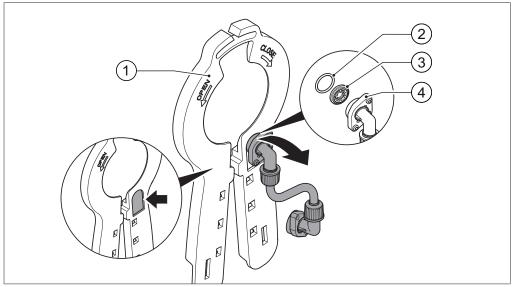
Diaphragm grips with notch in right-hand grip for removing non-return valves
